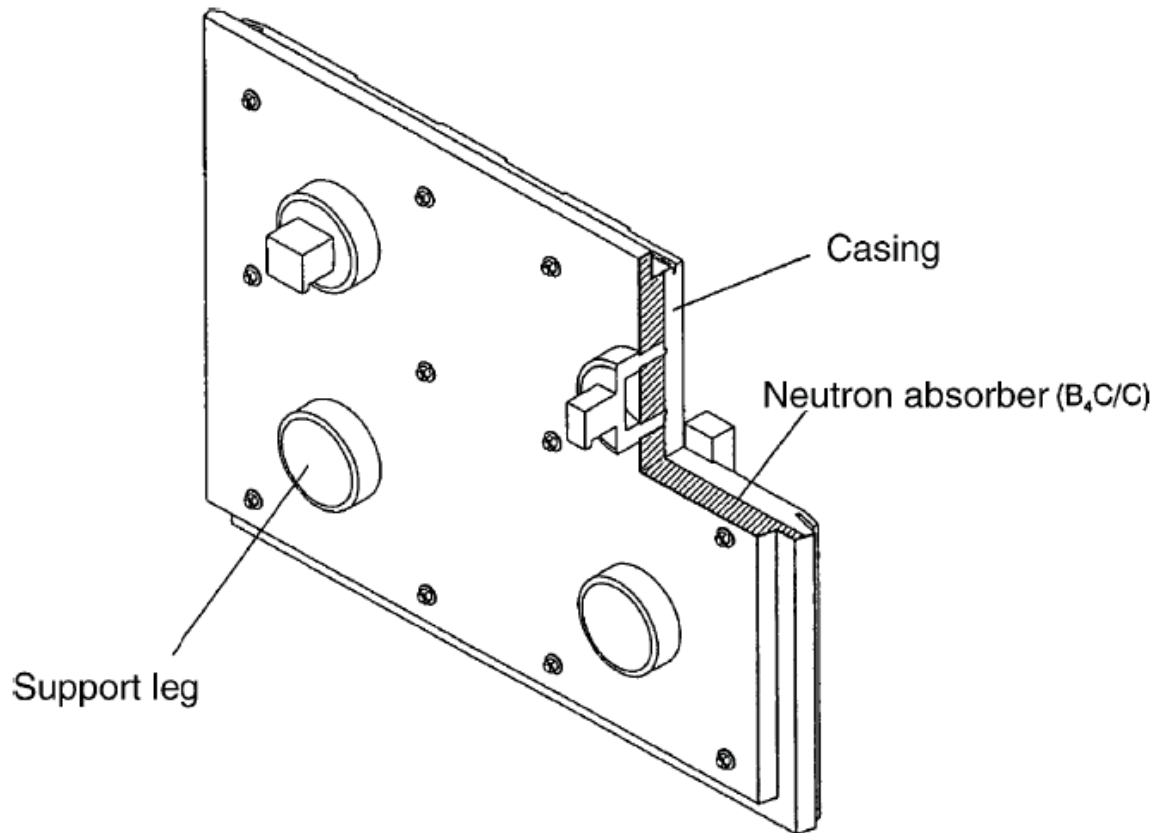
Side Shielding Block (Ref. 6, p. 86).
